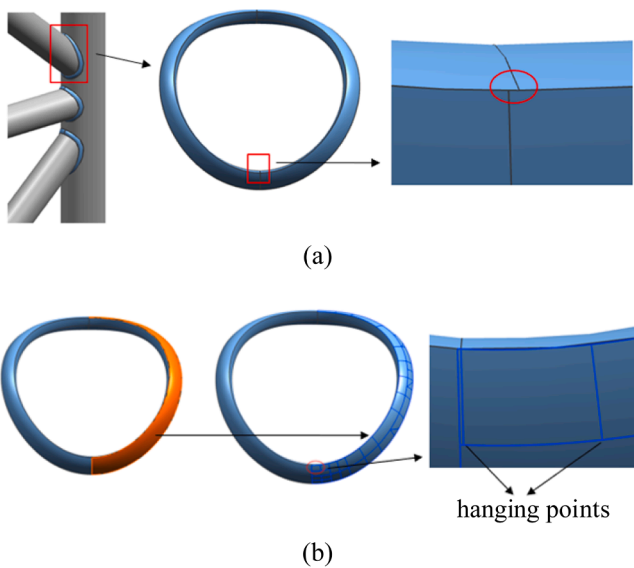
Steel frame weld model:(a) a weld bead with extremely short edge; (b) mesh results.
